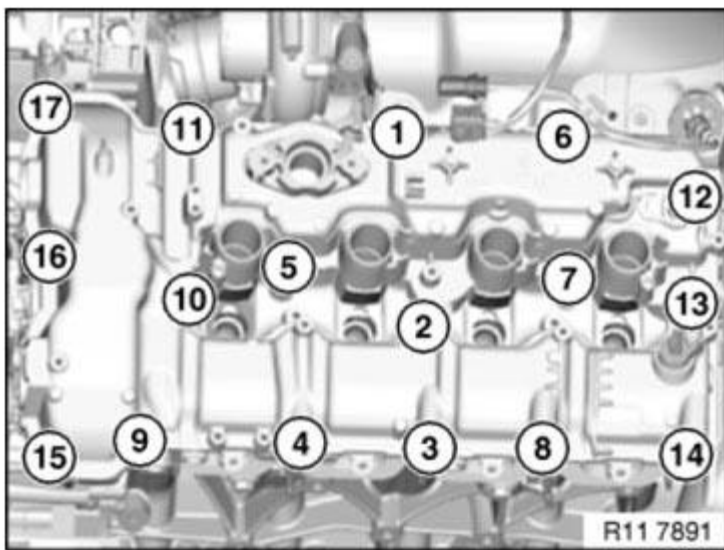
Identifying Cylinder Head Cover Bolts Releasing Sequence
